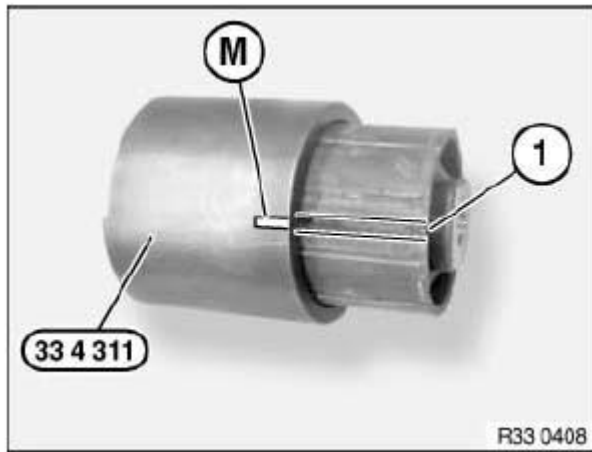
Identifying Special Tool (33 4 311) On Rubber Mount
